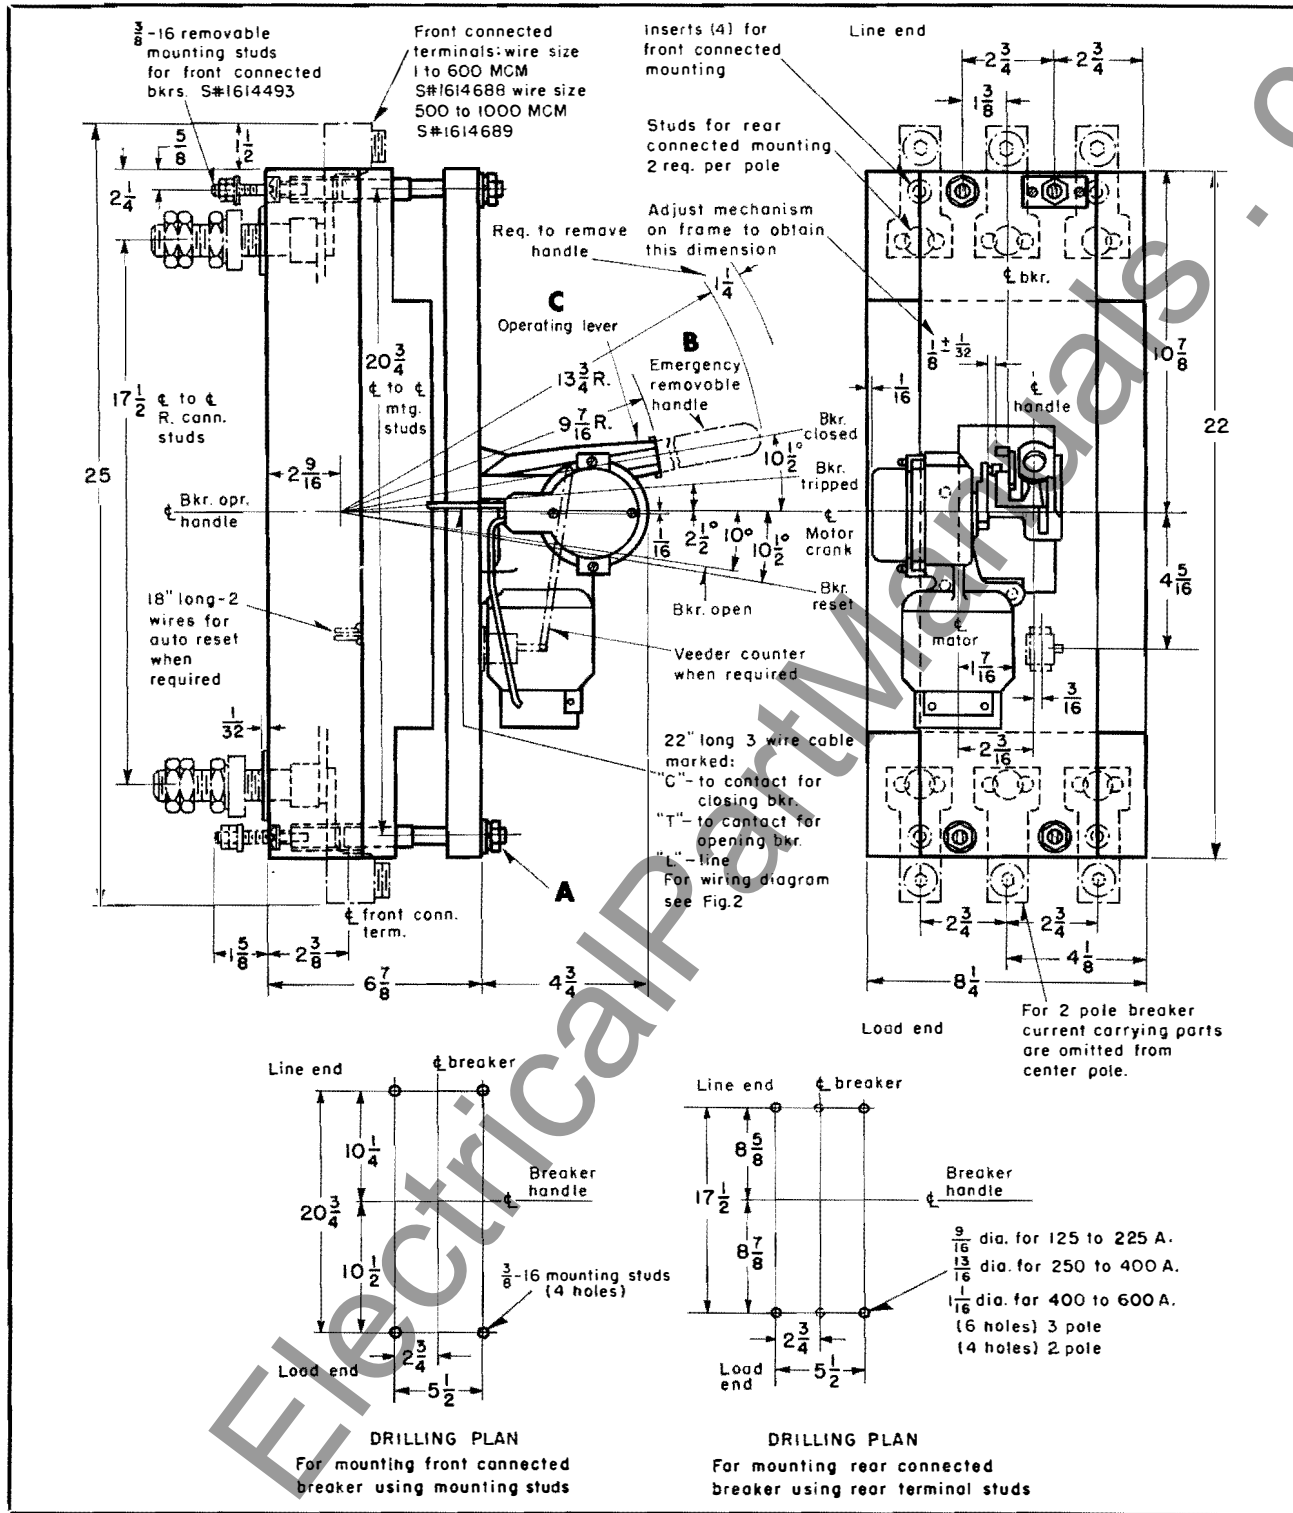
Dimensional Drawing, Dimensions in Inches, of 600 amp. L Frame Breaker, with Remote Control.
